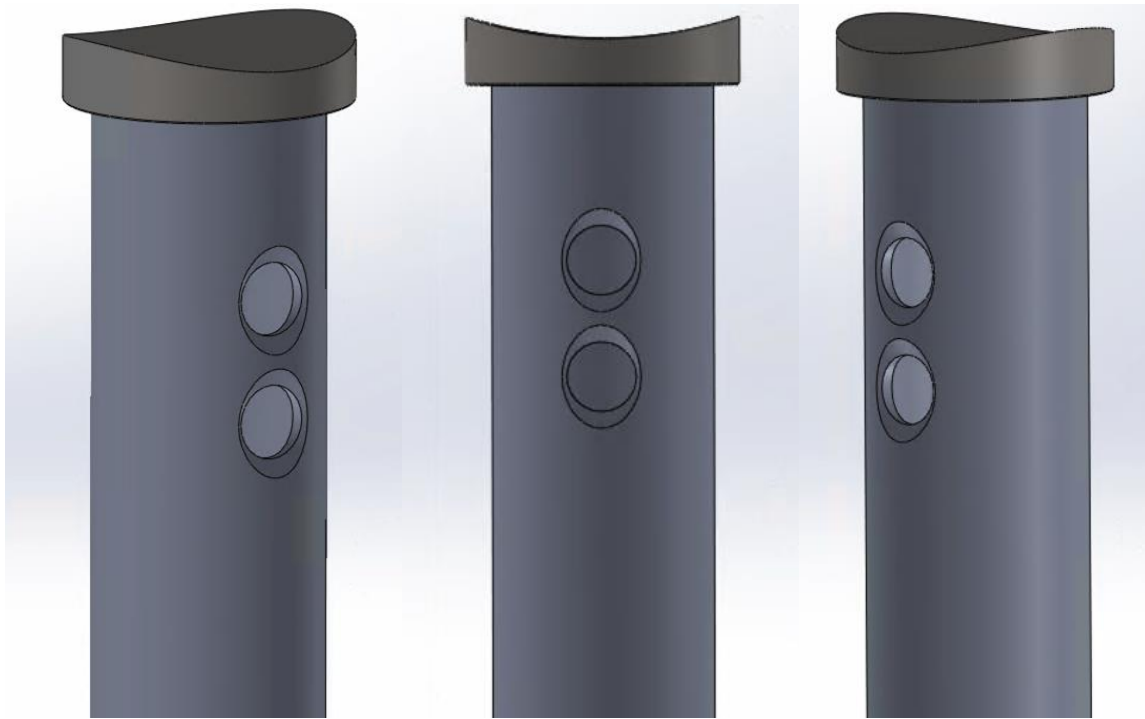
Front and isometric views of final aerosol injector design in CAD software. The outlet holes have 12-mm diameter with 20-mm center-to-center spacing and beveled edges for easy passage over sealing o-rings. The top portion of the injector is curved to match the inner diameter of the shock tube when retracted and is made to mount to a custom port for attachment to the sidewall of the shock tube.
